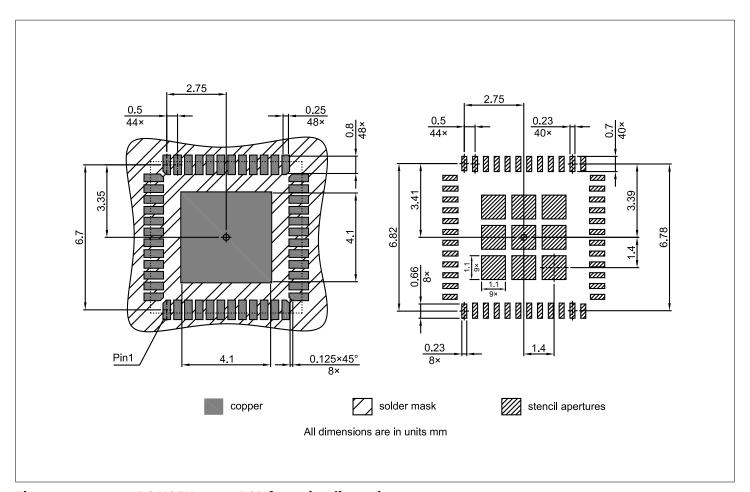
PG-VQFN-48-78 PCB footprint dimensions
